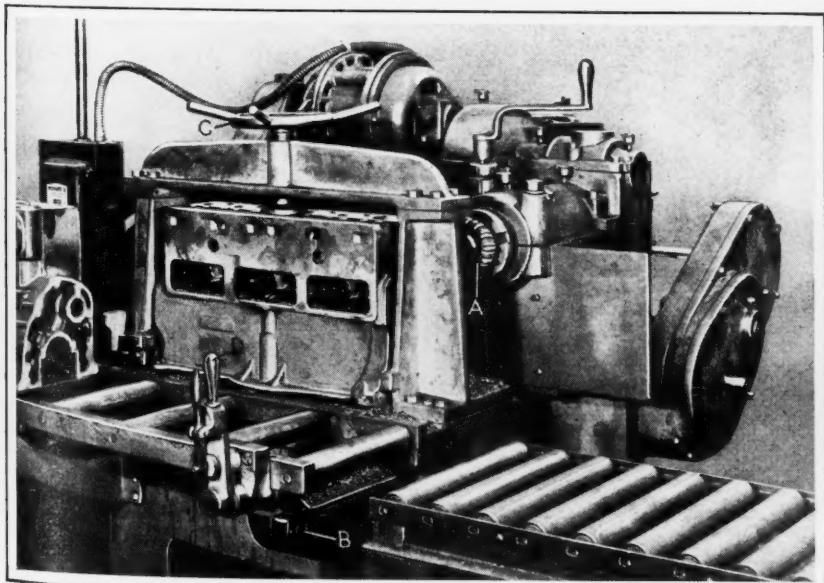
Special Milling Machine Designed for Milling the Water-cover Face
